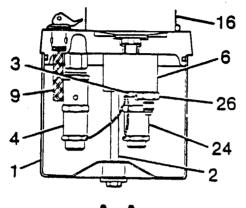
Hydraulic Power Pack Assembly (Sheet 1 of 2)
